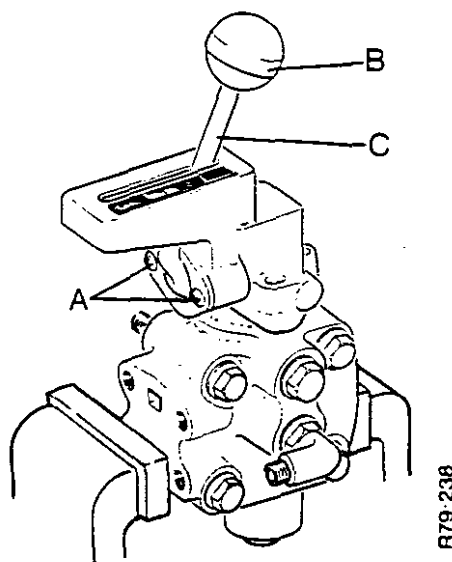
DISASSEMBLY OF THE THREE-WAY VALVE
